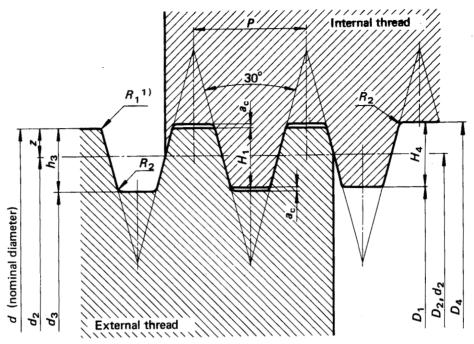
Profiles for threads with clearance on the crest and without clearance on the flank
